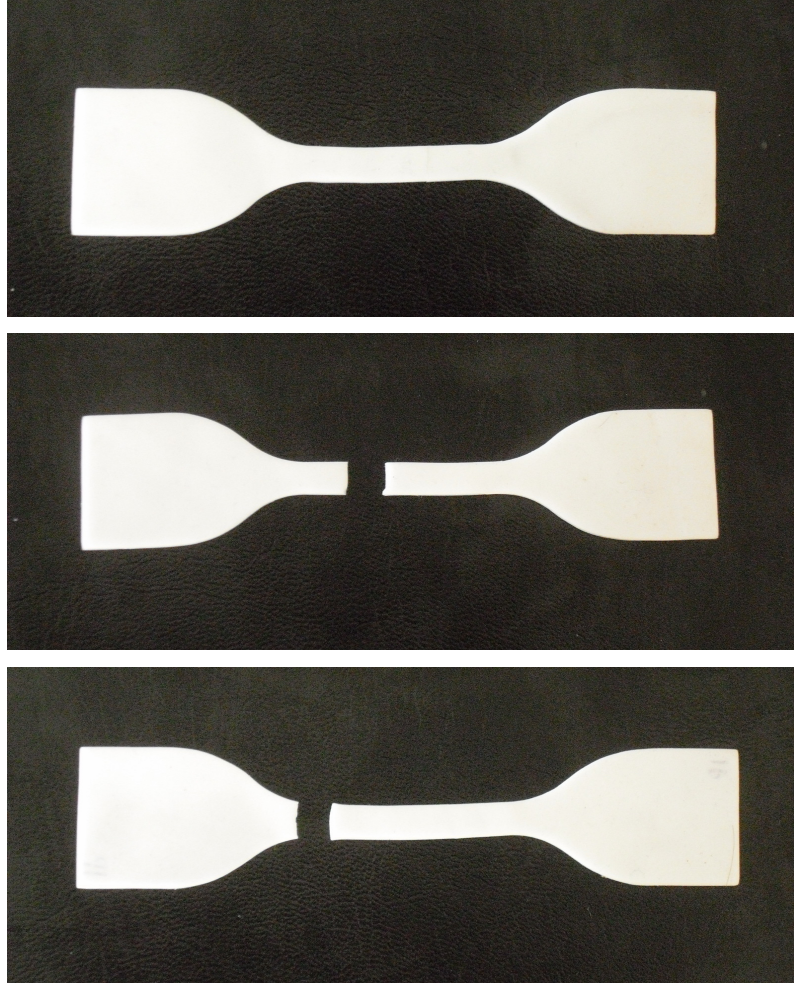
A photograph of a typical dumbbell test piece and a pair of dumbbell test pieces after testing.
